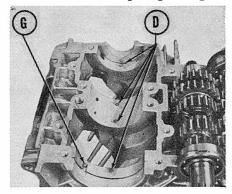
Refer to text for checking crankshaft for correct assembly or wear.
